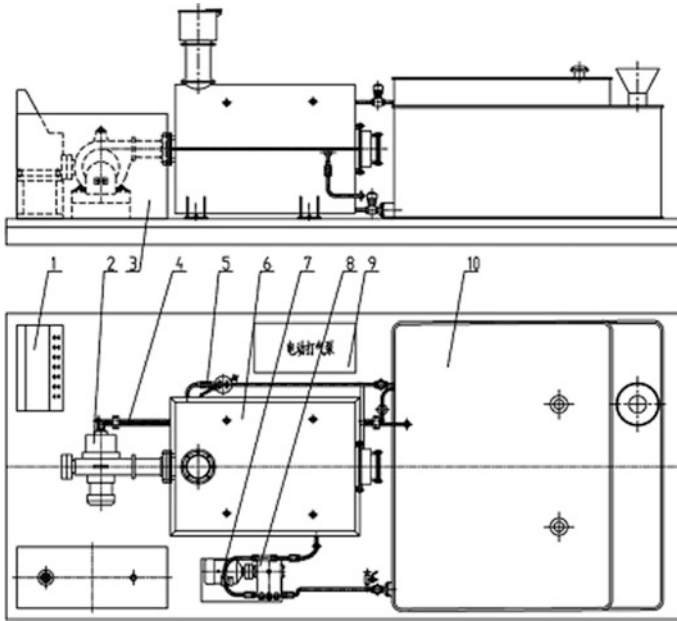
Sketch of skid-mounted structure. (1, Control Cabinet 2, Burner 3, Generator 4, Diesel Pipeline 5, Boiler Exhaust Pipeline 6, Vehicle Special Boiler 7, Motor Drive 8, Ceramic Piston Pump 9, Electric Air Pump 10, Oil and Water Cabinet)
